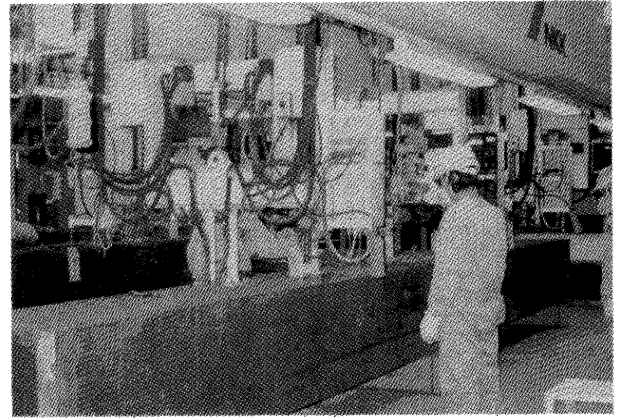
12 heads eletroslag welding apparatus for diaphragm.
